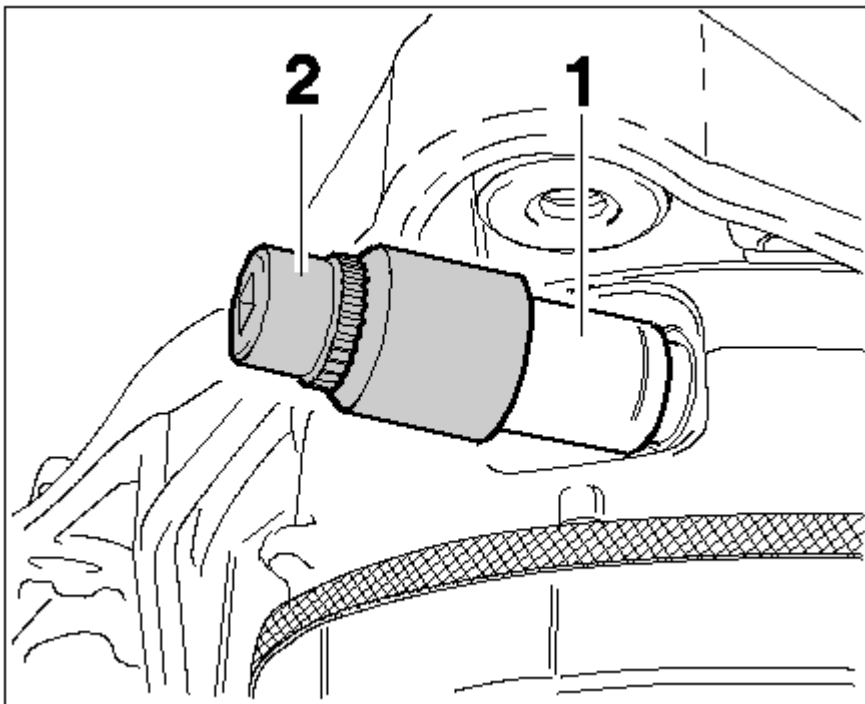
Removing/Fitting Residual Pressure Retaining Valve
